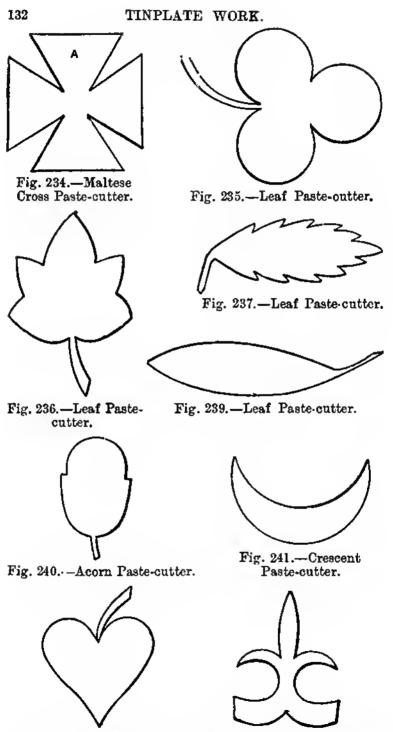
Leaf Paste-cutter. Fig. 242.—Border Paste-cutter.
